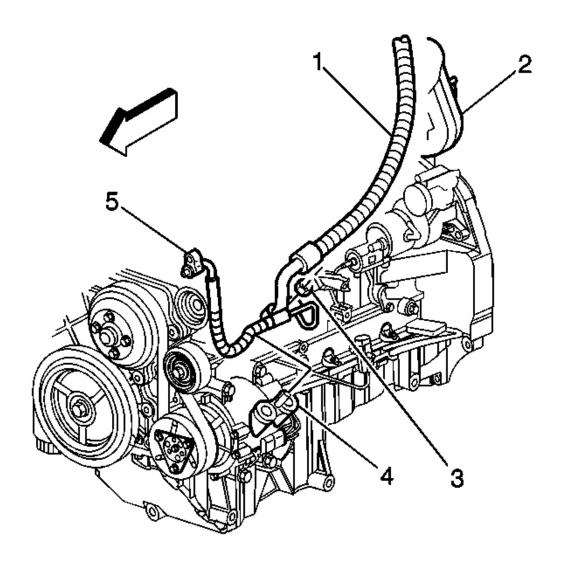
View Of Compressor Hose Assembly Courtesy of GENERAL MOTORS CORP.
